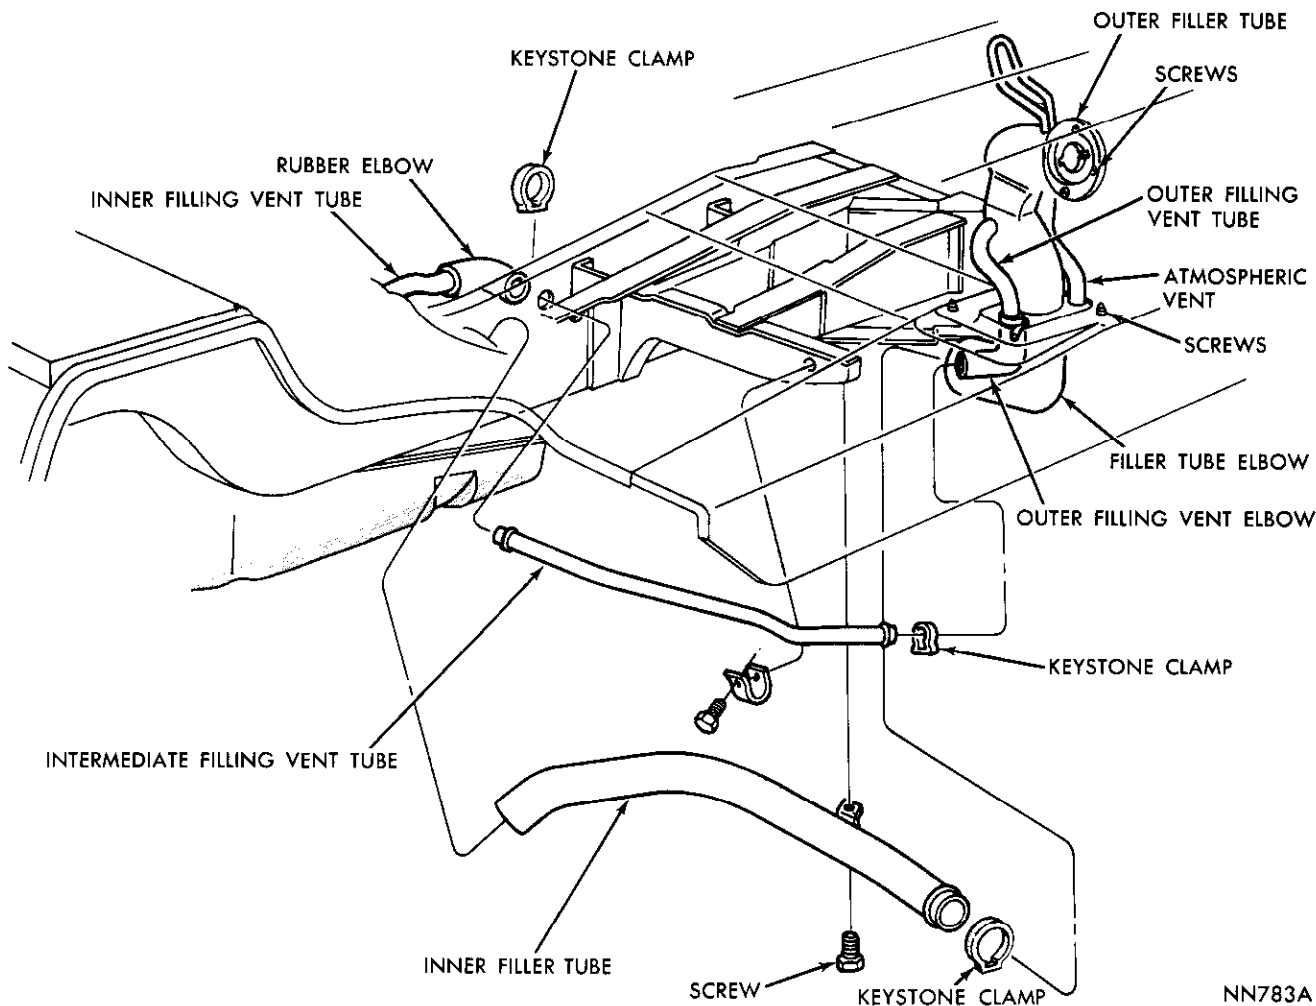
Fuel Tank Assembly (116.5 inch Vehicles) Station Wagons
